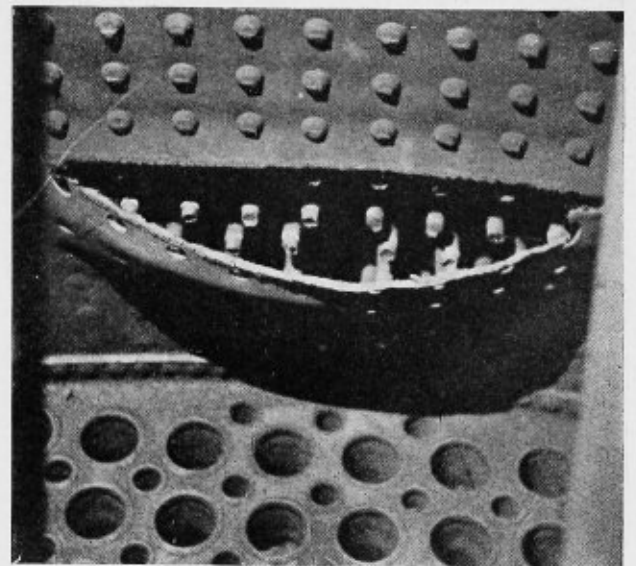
Failure of Crown Sheet at Welded Seam
